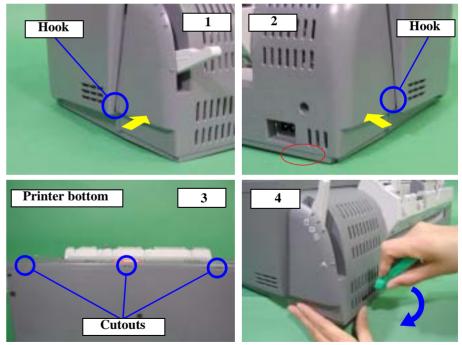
Hooks and Cutouts That Secure the Rear Housing
